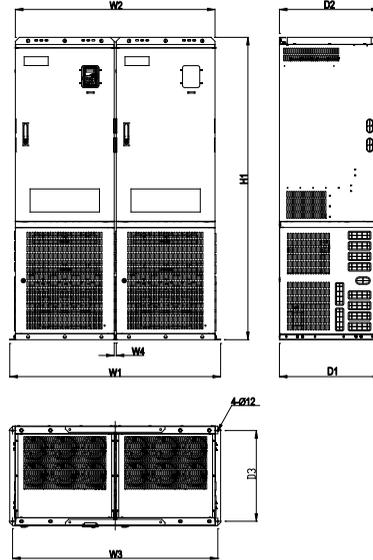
Parallel mounting diagram for 380V 710–3000kW and 660V 800–3000kW
